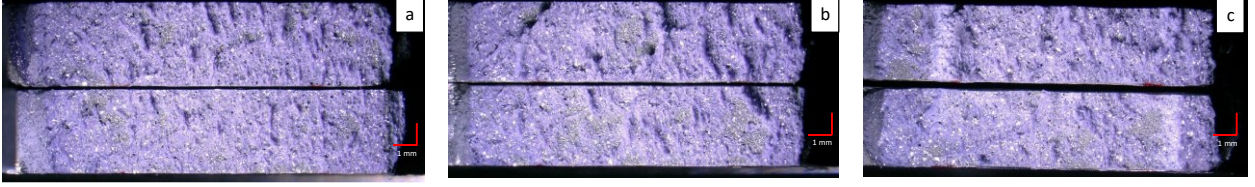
Typical fracture surface of 75° mixed mode specimens for 0.18 mm (a), 0.3 mm (b), and 0.64 mm (c) bond line thickness
